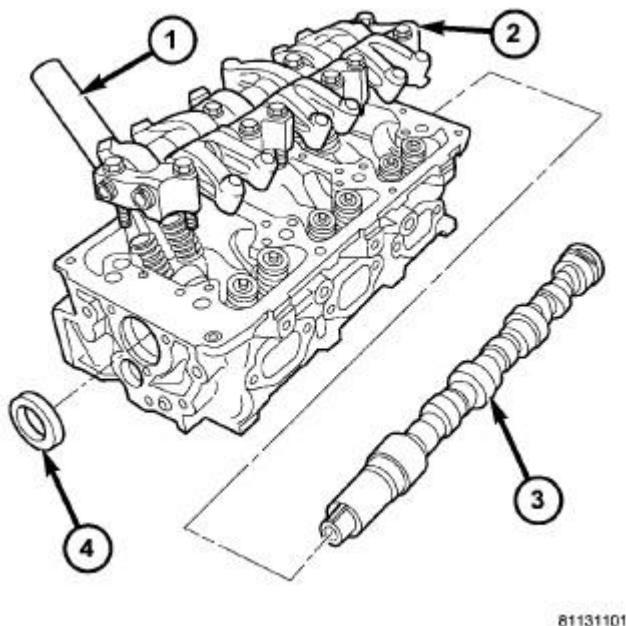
Spark Plug Tube, Rocker Arm Assembly, Camshaft & Seal
